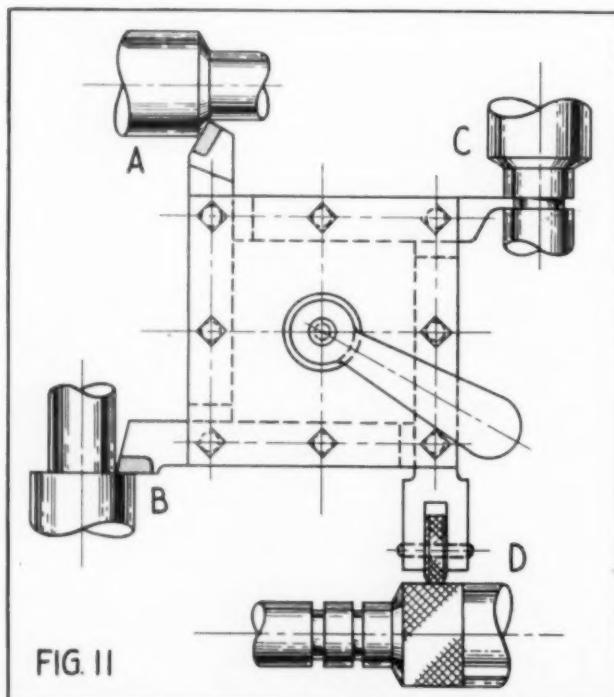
Turret toolposts permit use of several tools in one setup, thereby saving the time ordinarily lost in changing tools. In this diagram, tool A is used for turning, tool B for cutting the shoulder, tool C for grooving, and tool D for knurling. Turret toolposts save time on multi-operation turning work.
